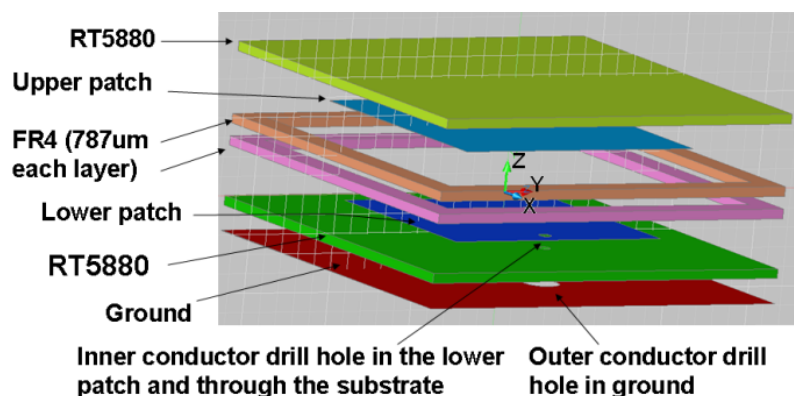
The exploded view of the fabricated prototype of the 6 GHz RF transducer scaled design.
